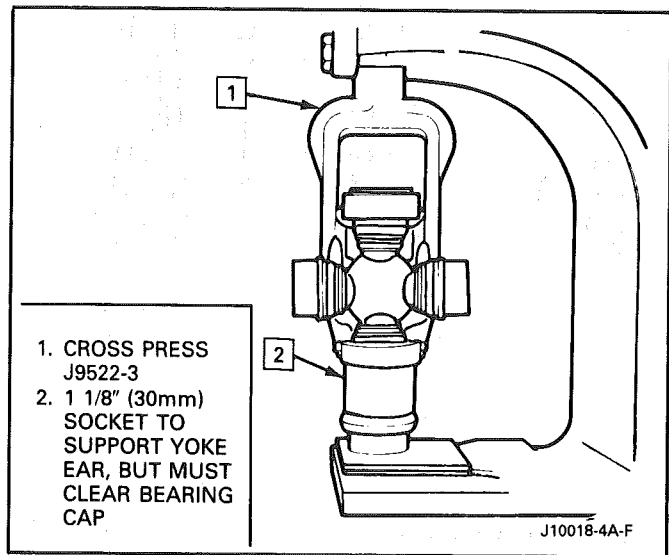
A-18 Pressing Out Universal Joint Bearing Cap
